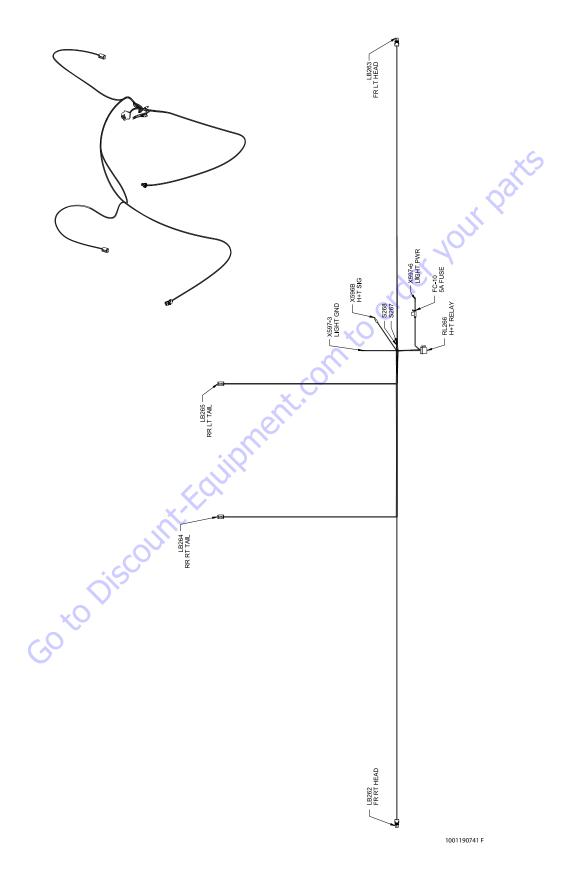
Chassis Head /Tail Light Harness - Sheet 1 of 2
